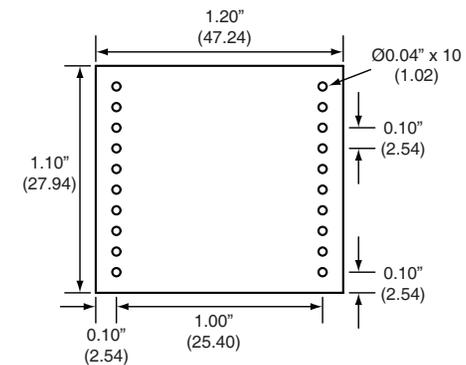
EVM-GPS-R4 PCB Layout Dimensions
